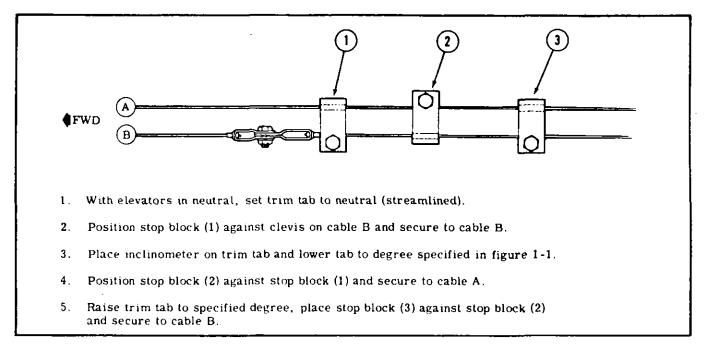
Elevator Trim Tab Travel Stop Adjustment
